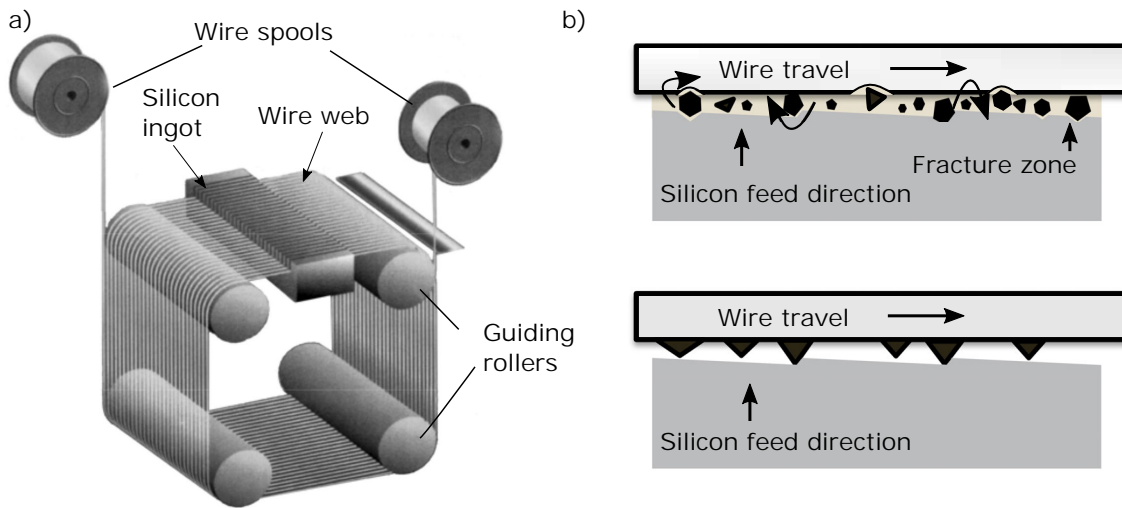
(a) Schematic of multi-wire sawing process [166]. (b) Material removal in slurry sawing. (c) Material removal in diamond wire sawing [122].
